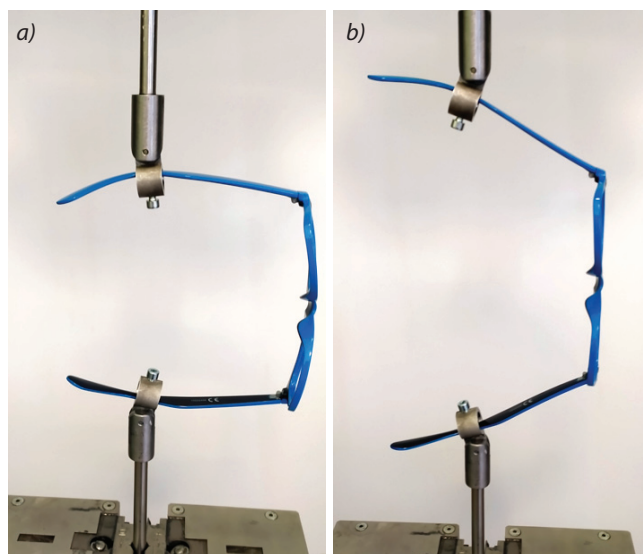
View of the frame: a) mounted in a special holder, b) during the test
